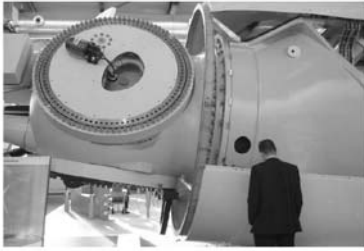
Cast load-bearing structure with in-plane rotor bearing on a Vestas V-90 (Gleitsch, Vestas)
